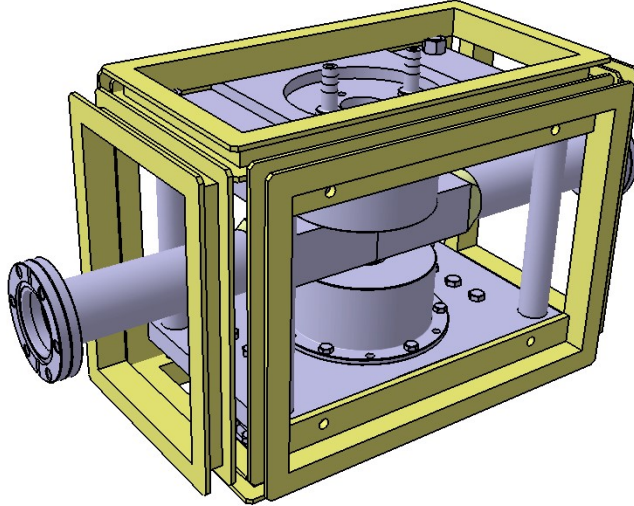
Shim coil assembly: Assembly of coils in Helmholtz configuration is used for the cancellation of stray magnetic field. The frames are made using a 3D printer.
